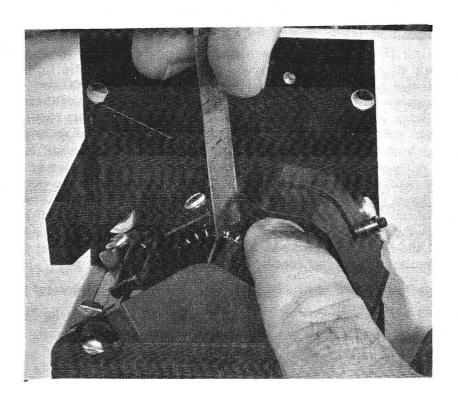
Checking the Sprocket in Relation to Tape Riding Surface.
